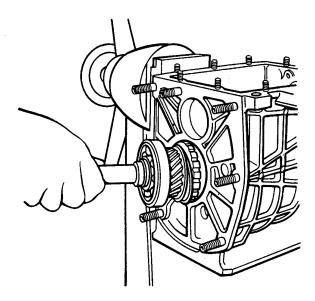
Removing Clutch Shaft from Gearbox Housing
